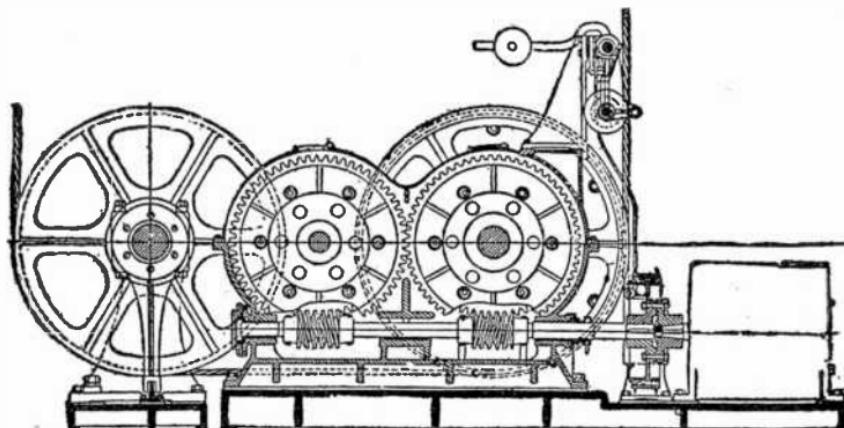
,774.—Tandem worm drive machine with independent concave face gears meshing with the worm as shown by the portions of the larger gears cut away above the worms. As shown, there are four gear wheels bolted together in pairs, the two larger ones meshing with each other, and the two smaller ones with the worms.
